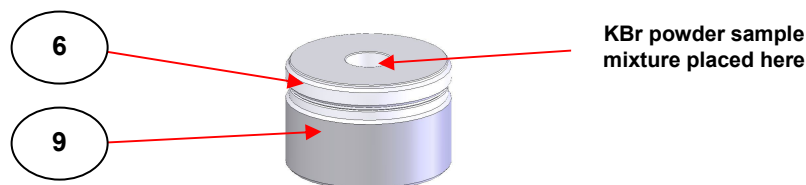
7mm Pellet Die Ring Holder (Body) on Bottom Anvil
